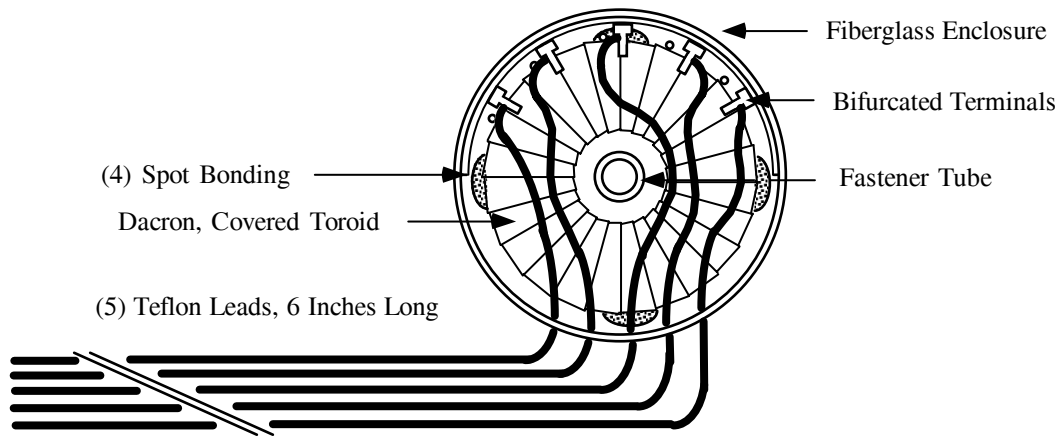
Transformer Top View of Assembly showing the Internal Construction.
